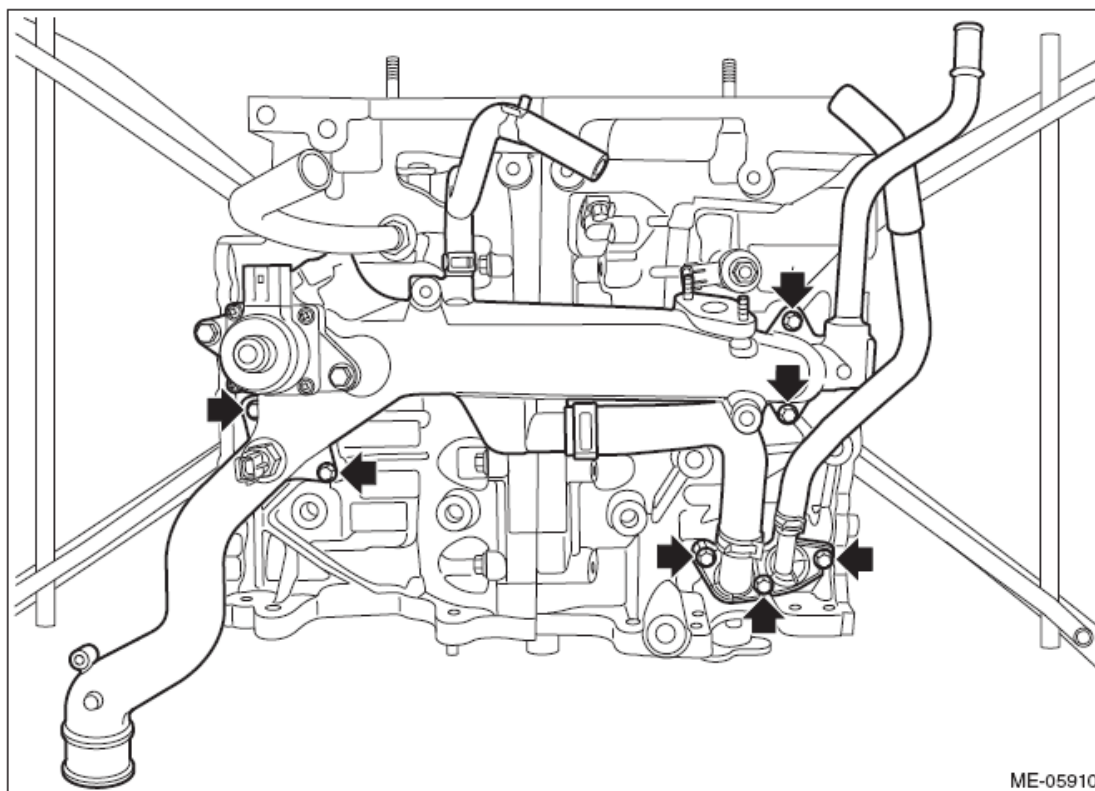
Installing Water Pipe Assembly And PCV Connector To Cylinder Block
